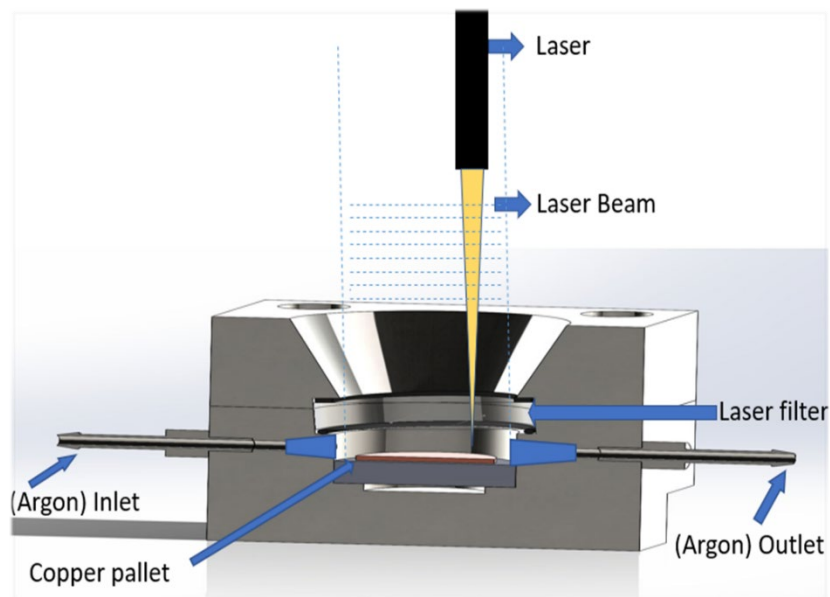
Schematic of laser sintering setup demonstrating the passage for laser beam, argon inlet. Outlet, laser filter and copper pellet in the inert environment.
